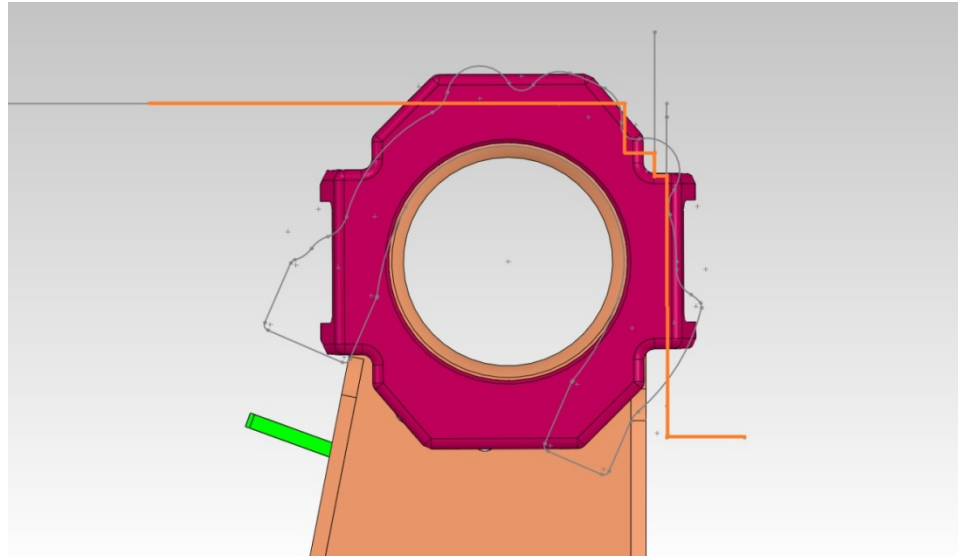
Geometric Constraints on the AVASS Roller Bearing Lower Brackets
